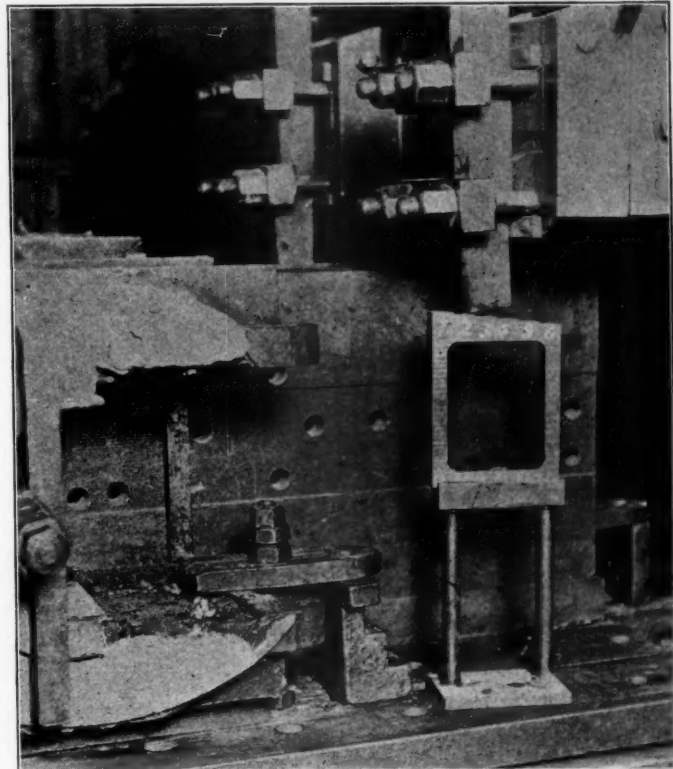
Gage Used in Setting Tool for Planing Boxes
